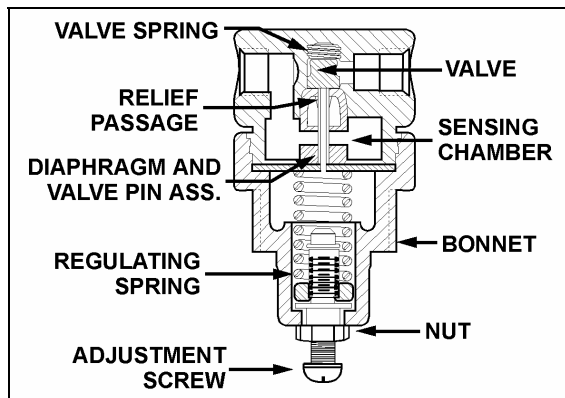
AIR PRESSURE REGULATING VALVE 12141B
